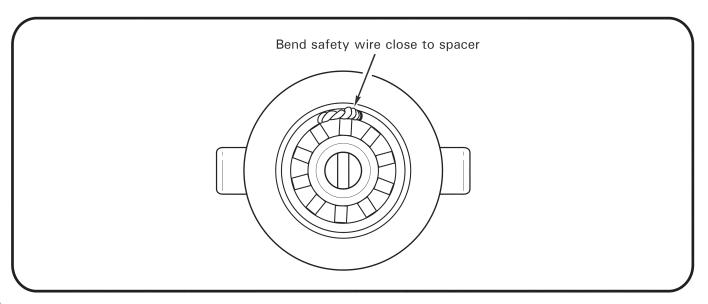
Spring pin and safety wire installed (view looking forward from aft end of co-pilot stick assembly)
